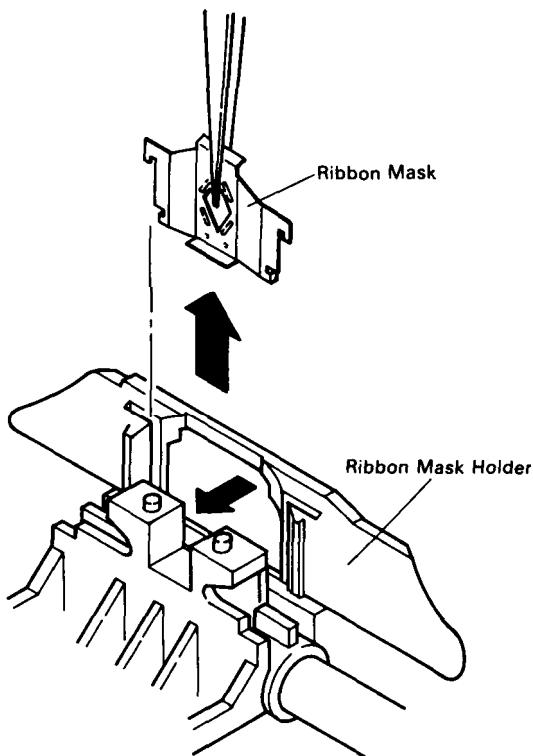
Ribbon Mask Holder and Ribbon Mask Configuration
